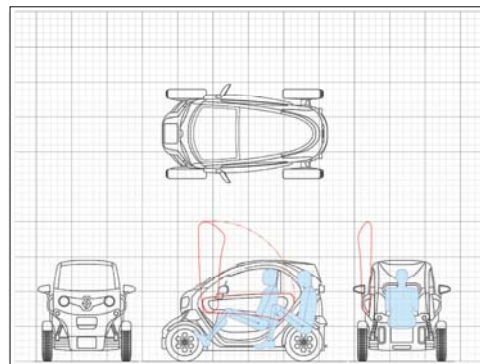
Tandem riding interior package and door opening furrows of Renault Twizy
